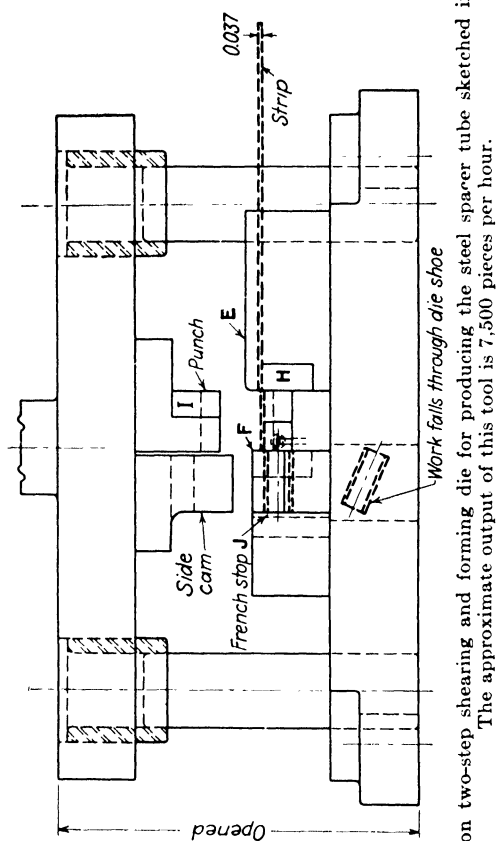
High-production two-step shearing and forming die for producing the steel spacer tube sketched in the preceding figure. The approximate output of this tool is 7,500 pieces per hour.
